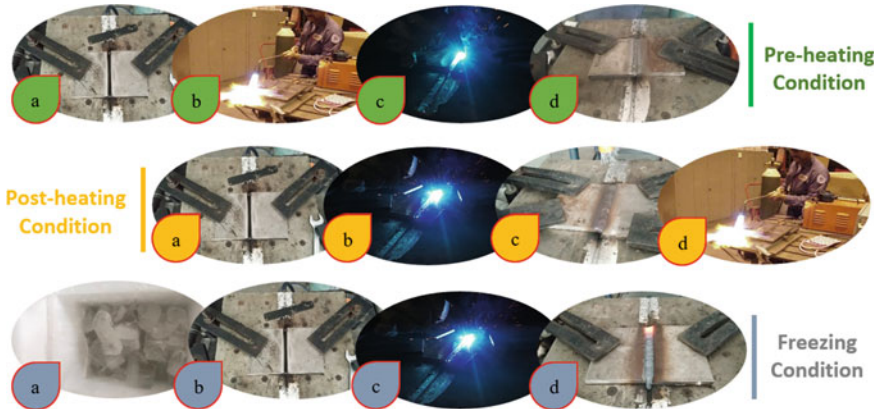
Sequential arrangement of dissimilar welding at three different ambient conditions
